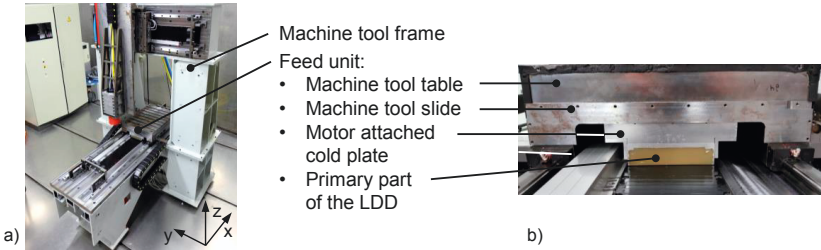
(a) Three-axis portal milling machine as demonstrator [IWF];
